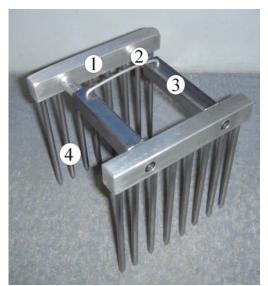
Prototype 1 1) Side beams. 2) Inner cross bar. 3) Outer cross bar. 4) Spikes.
